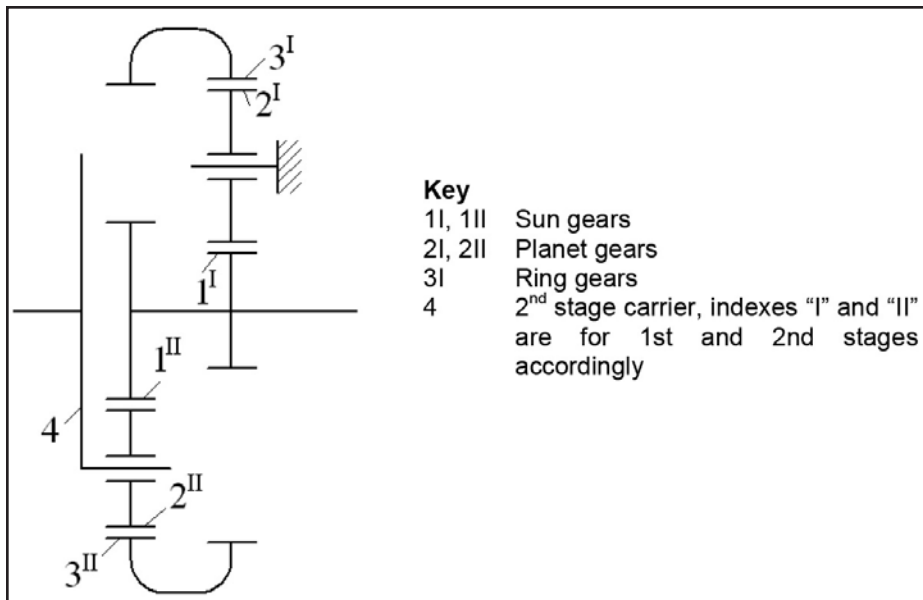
Two-stage planetary (arrangement B) with sun gears and ring gears of first and second stages joined.
